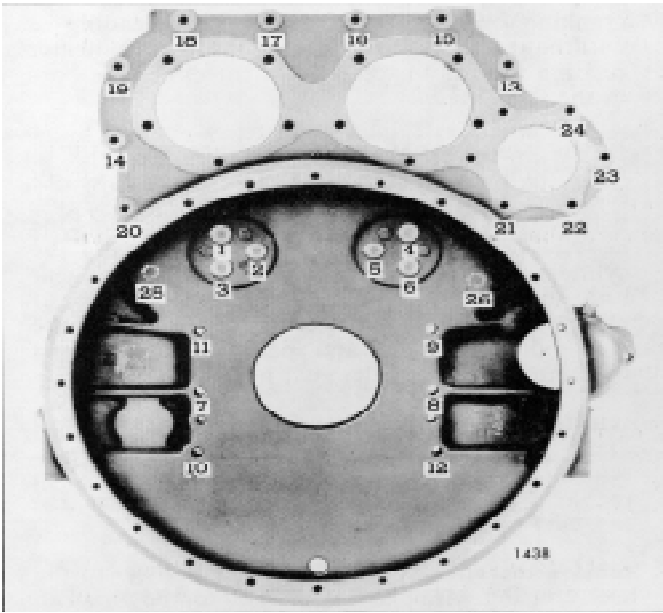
flywheel Housing Bolt Tightening Sequence
